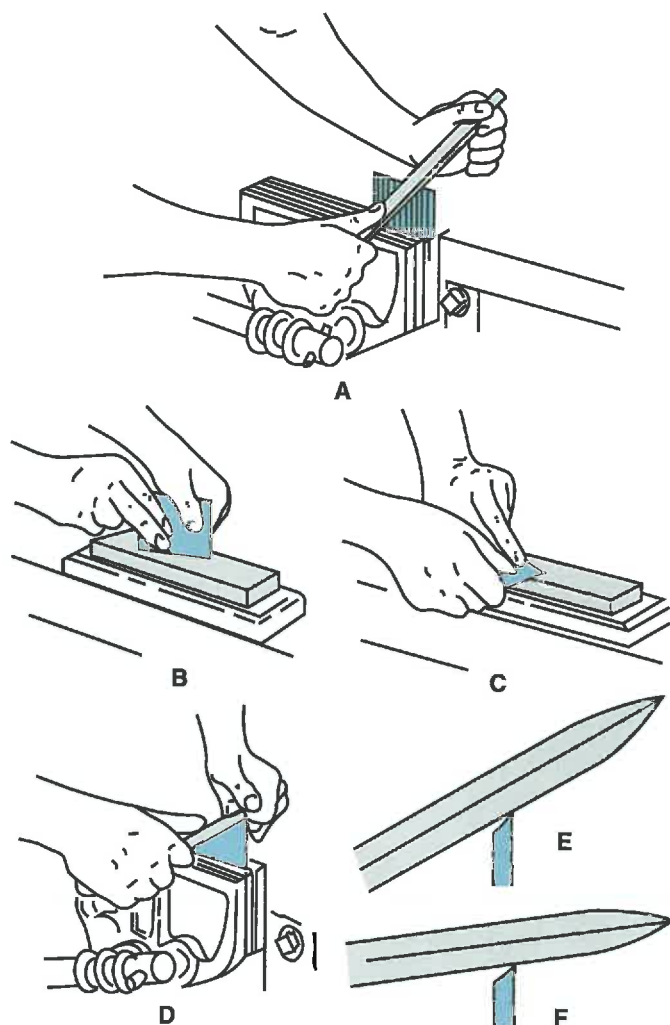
A—File a hand scraper blade straight and square. B—Then burnish the edge. (Chuck Davis Cabinets)
